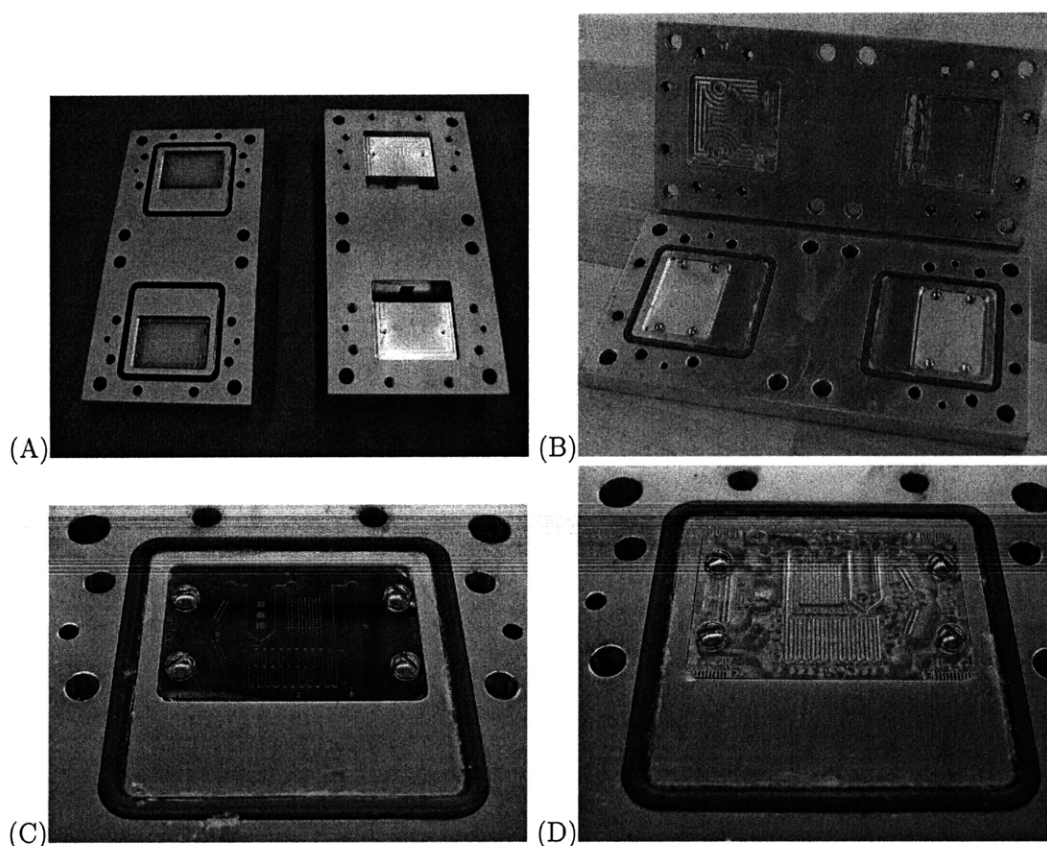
(A) Photo showing the empty mold cavities used in the manufacturing system. Inserts can be bolted into tapped holes on the mold half shown on the left. (B) Blank inserts bolted into mold cavities are shown. (C) Bulk metallic glass insert bolted into bottom half of mold assembly. (D) Micro machined, aluminum insert bolted into bottom half of mold assembly.
